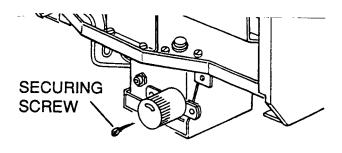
ACCESS TO THE BOILER ELECTRICAL TERMINAL BLOCK
